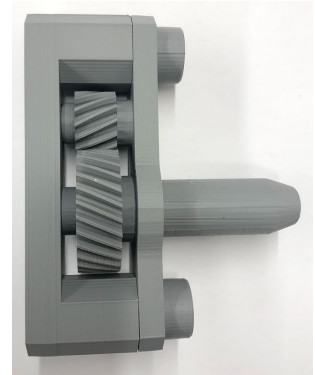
Assembled gearbox using the required mechanical parts that the robot placed into the caddy and delivered to the inspection table.
